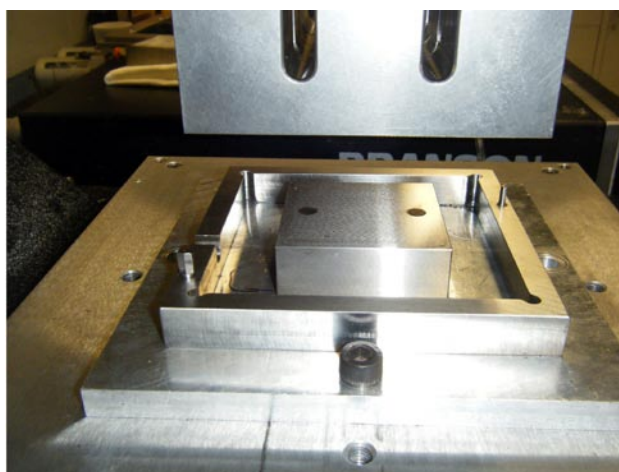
Experimental Seal Tooling for Ultrasonic Sealing of MEAs
